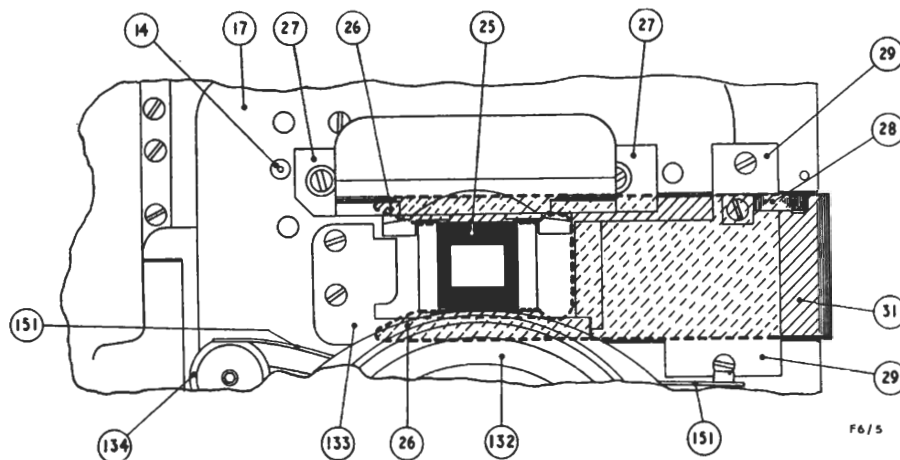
Part of forward sides of assembly and aperture plates, showing fitting of 16-mm gate and gate-holder
